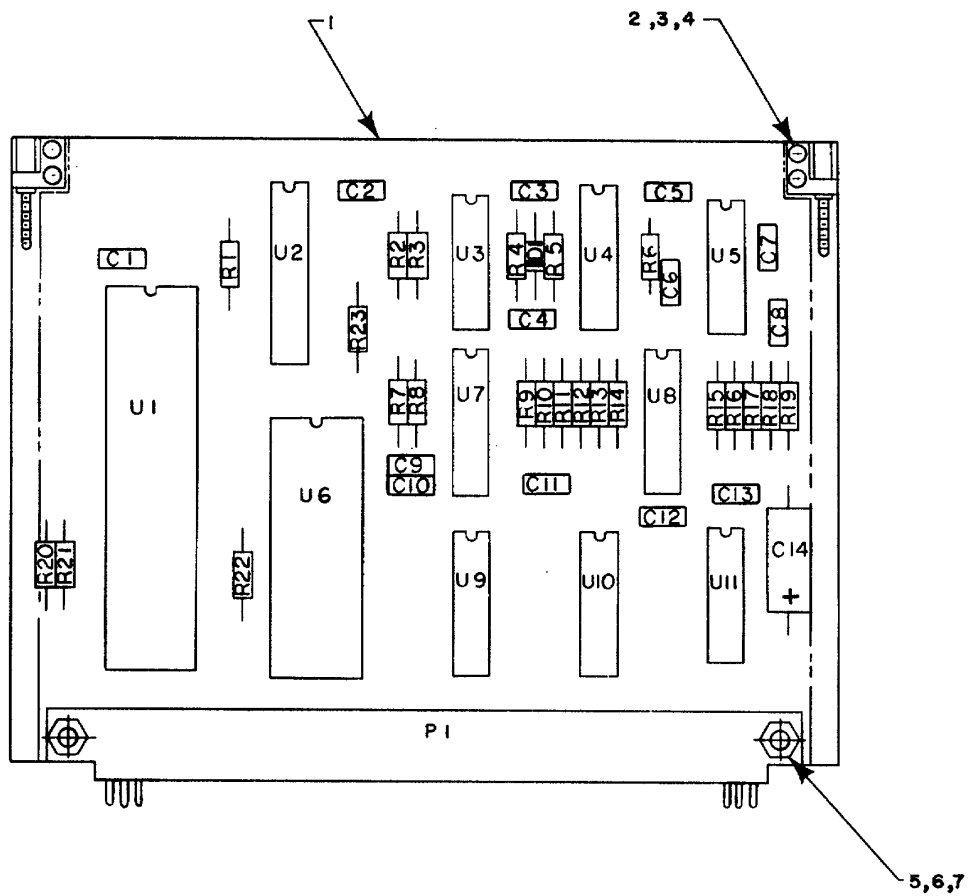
Circuit Card Assembly 1A4, Built-In Test
